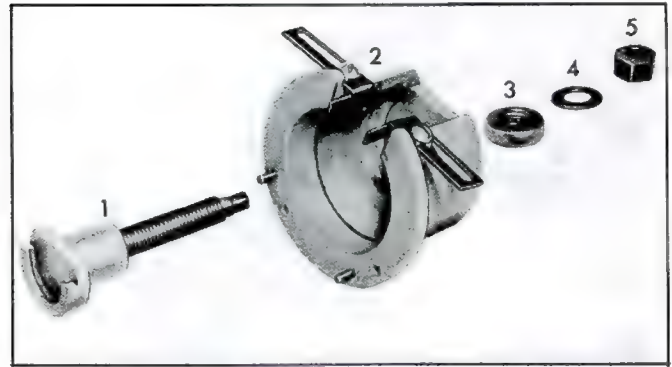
A-5—Clutch Gear Puller J-8361 Components
